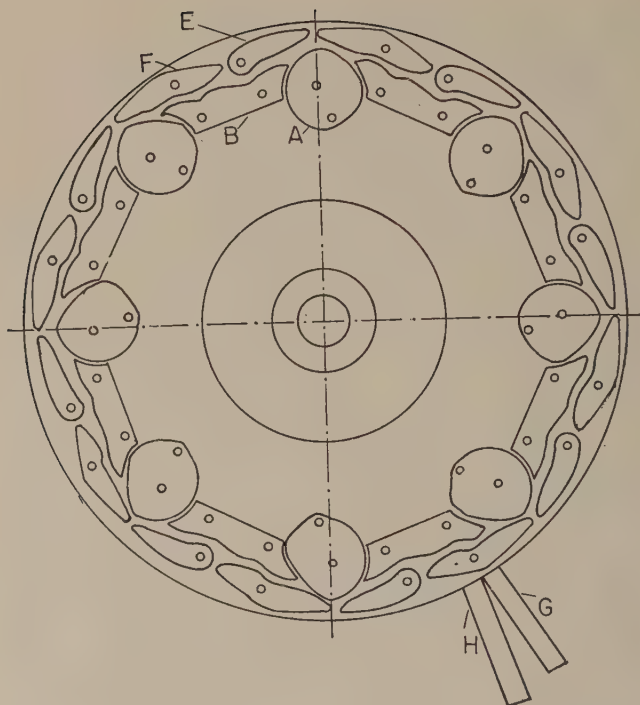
Diagram of dial cams of an eight-feed rib body machine.
